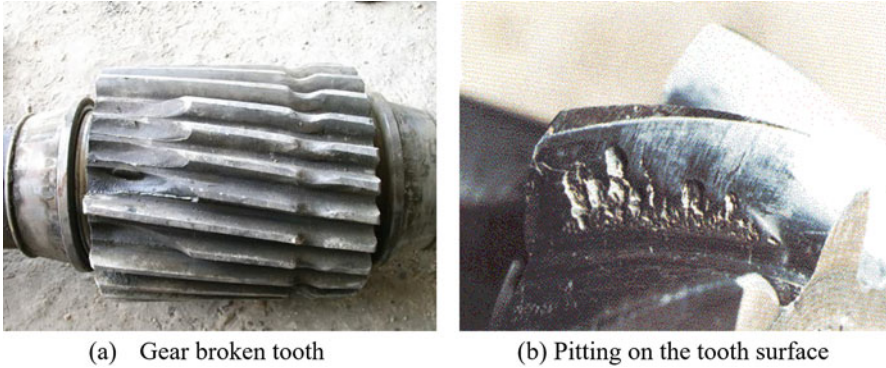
Fault profile of gear broken teeth and pitting corrosion
